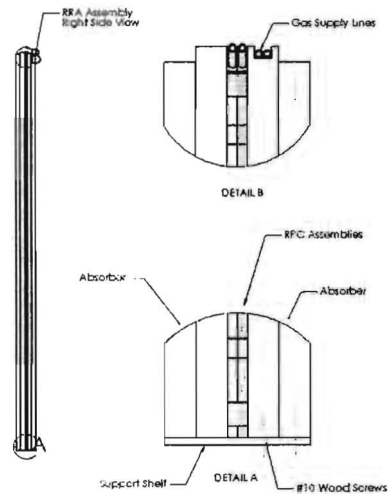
Side view of the RRA assembly showing the chamber support shelf in detail.
